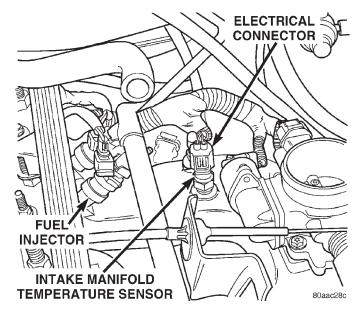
Intake Manifold Air Temperature Sensor— 2.5L Engine
